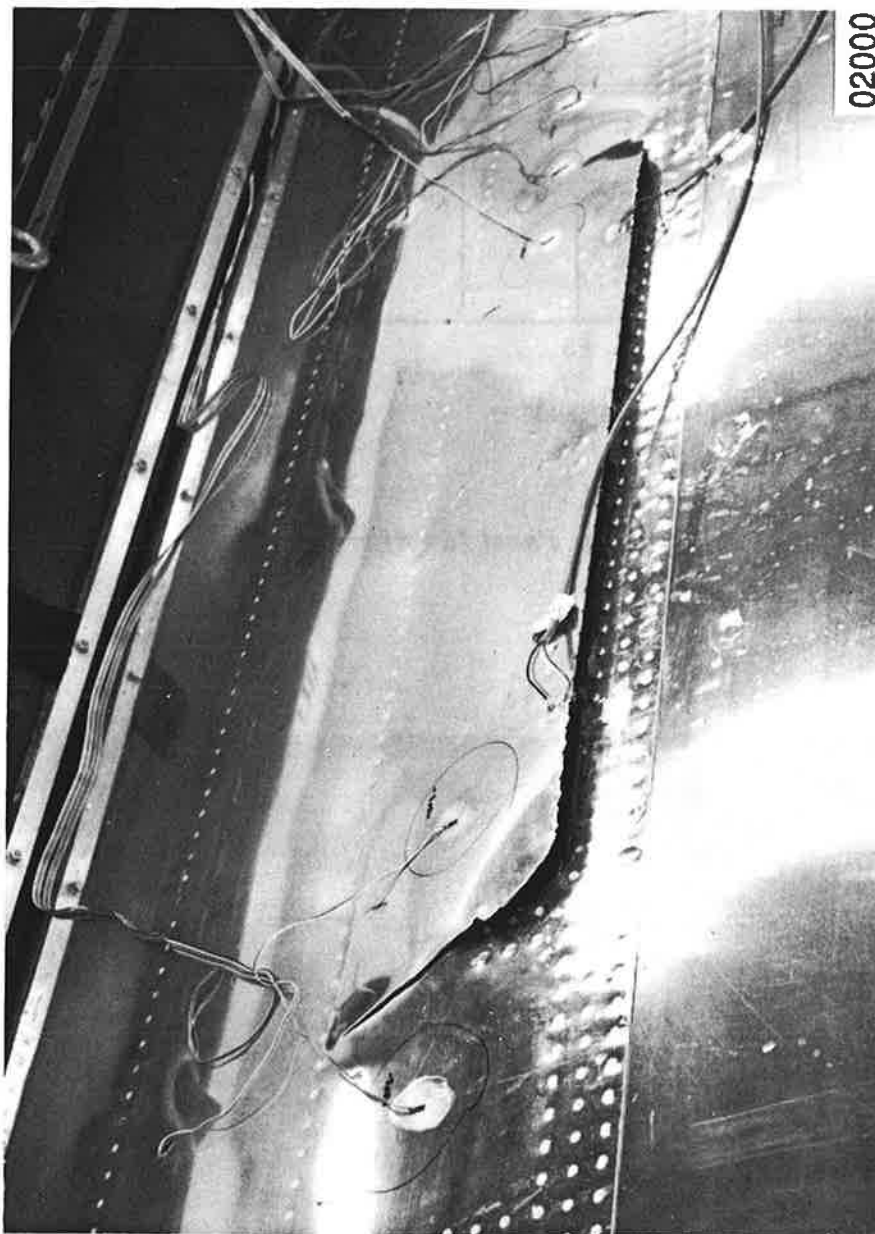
Panel 9: 23.36 in. Crack, MSD - After Fracture
